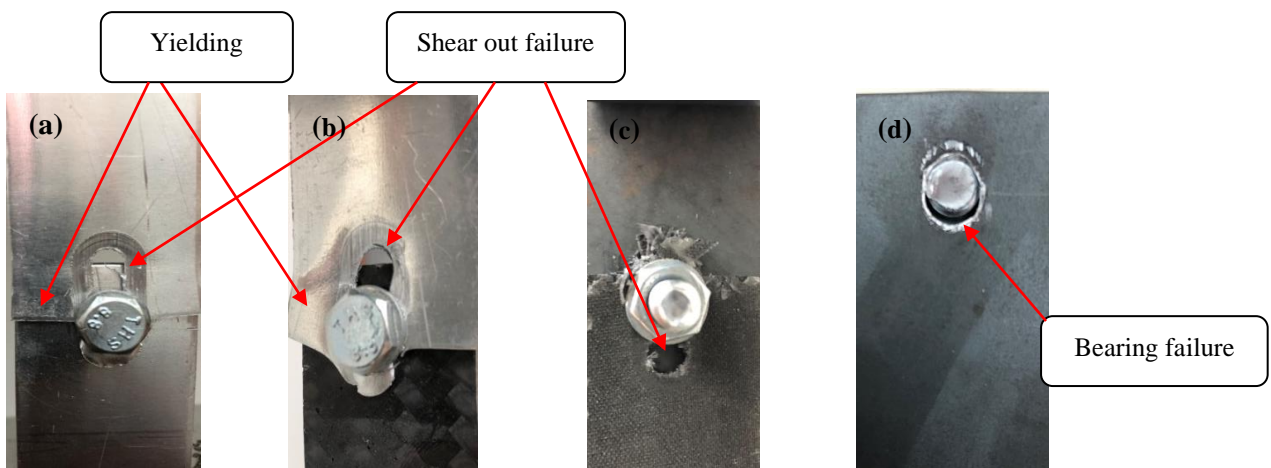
Failure mechanism of bolted joint for non-corroded specimens, (a) Al/Al, (b) Al/CFRP, (c) steel/CFRP, (d) steel/steel.
